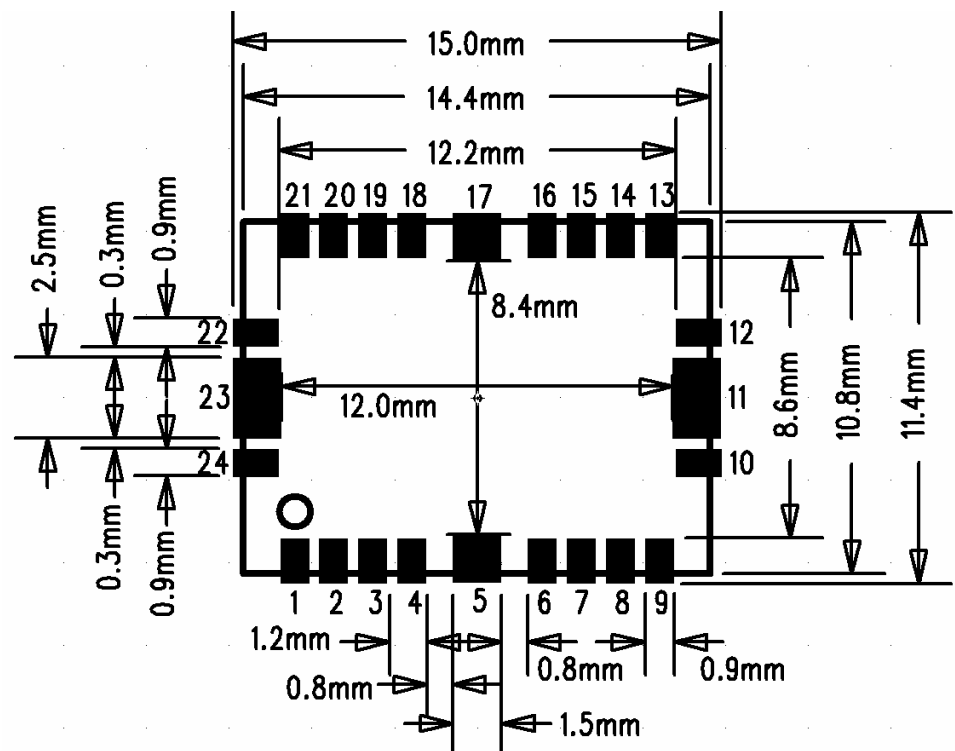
Suggested pad layout, occupied area and pin out, top view.
